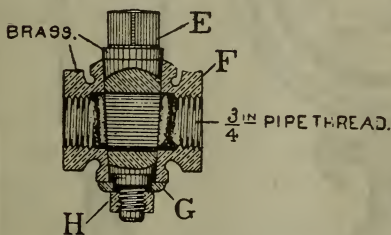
Locomotive Steam Heating Equipment for Furnishing Steam to the Coaches.
